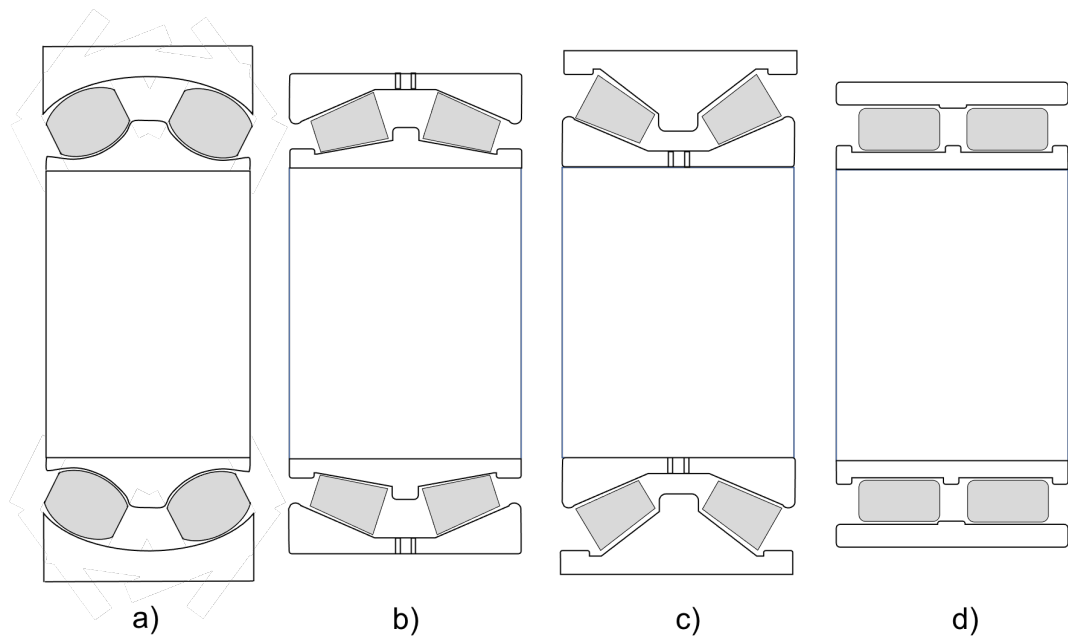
Depictions of double row roller bearing types. In alphabetical order these are double row spherical roller bearing (DSRB), double inner tapered roller bearing (DITRB), double outer tapered roller bearing (DOTRB) and double row cylindrical roller bearing (DCRB).
